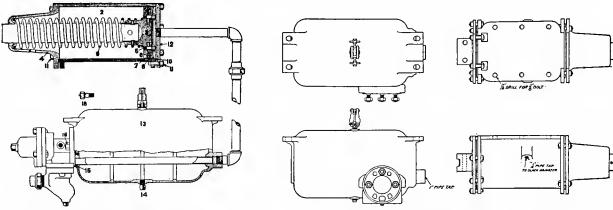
Freight Brake Cylinder with Detached Auxiliary Reservoir and Triple Valve.
